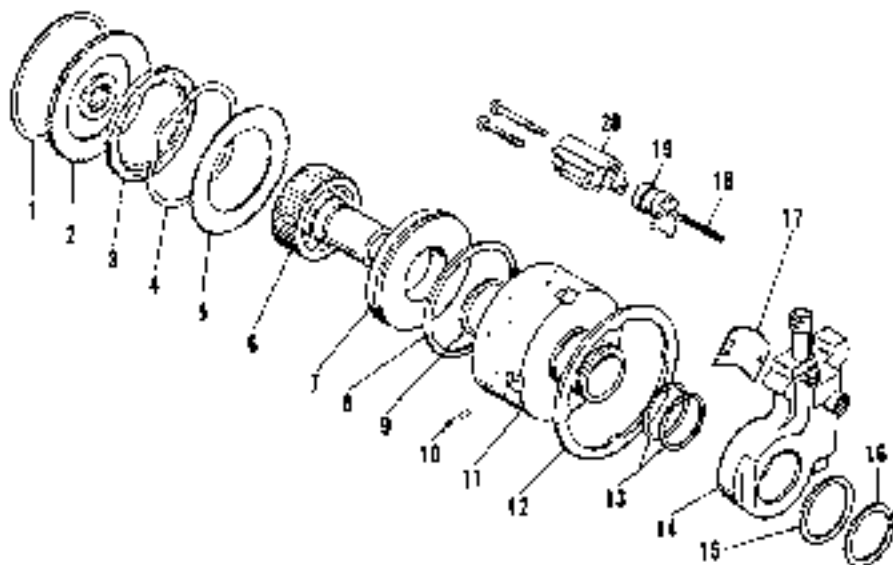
Exploded view of independent pilot multiple disc clutch and hydraulic brake unit.
